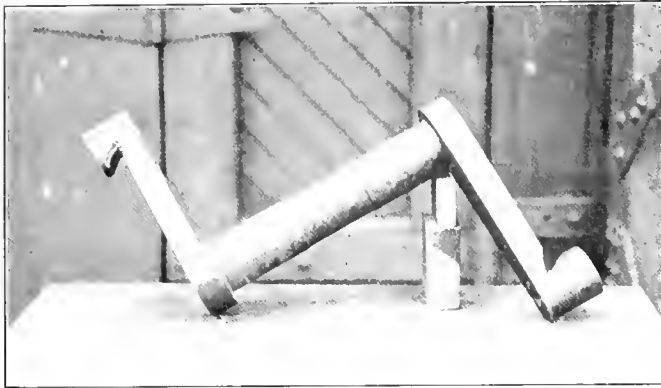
Cracked Rocker Arm Chipped for Welding.
